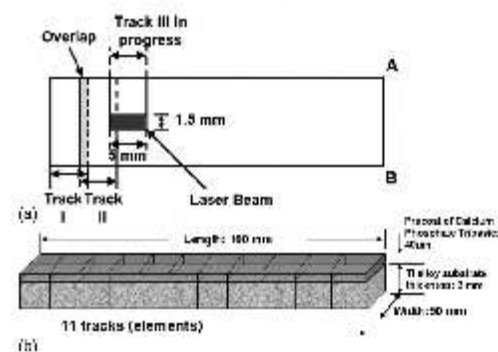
Schematic of coated sample. (a) 2D view of the ongoing laser processing and (b) 3D view of laser processed sample.
